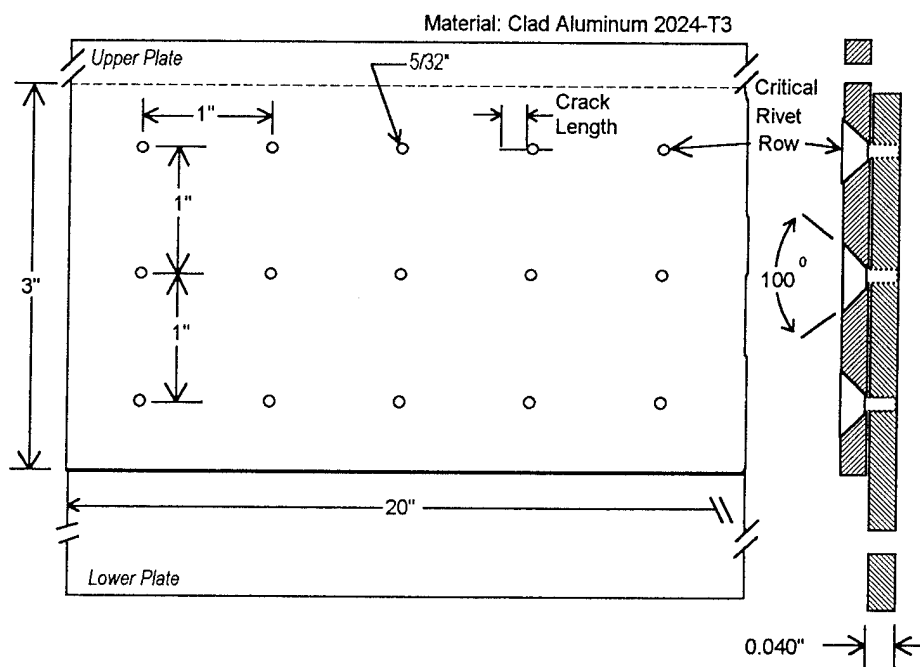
LAP SPLICE JOINT SKIN TEST SPECIMEN CONFIGURATION
